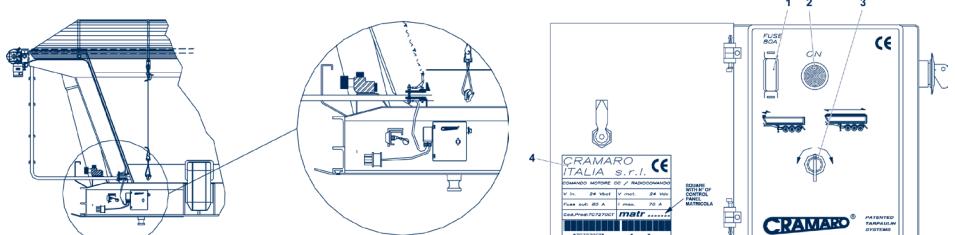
b. – Electrically operated roof sheet, type "Cramaro"
